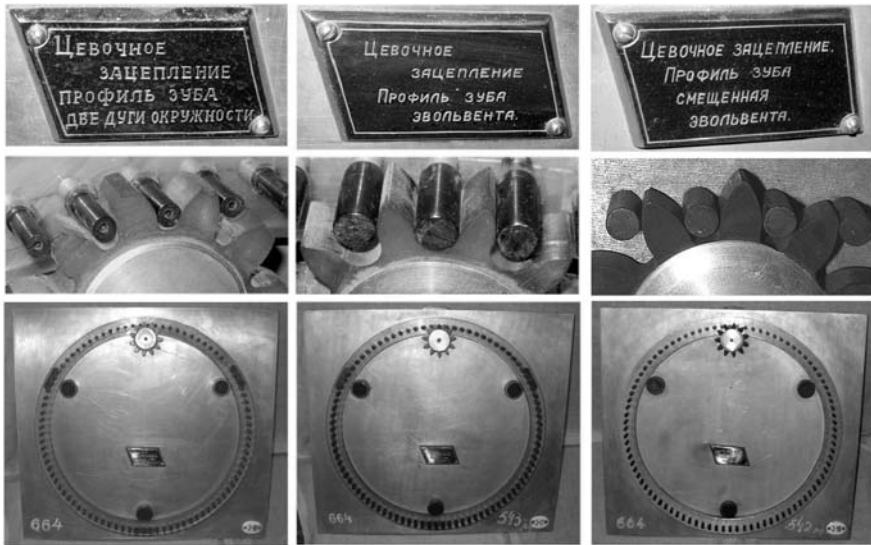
Models of trundle toothed gearing with various profiles of pinion teeth
